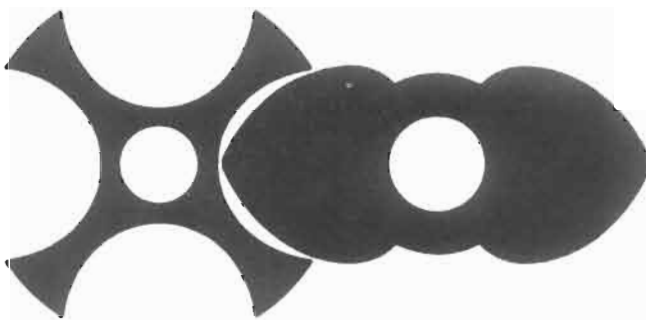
Helical four fluted gate blower rotors/two lobes main rotor intermeshing. See Figure 6-44. By permission, Gardner-Denver Industrial Machinery-Cooper Industries.
